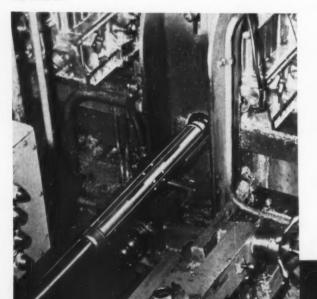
Stake seamer and positioner introduced by Air Reduction Sales Co.
